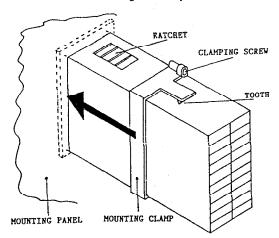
PANEL-MOUNTING A CONTROLLER
